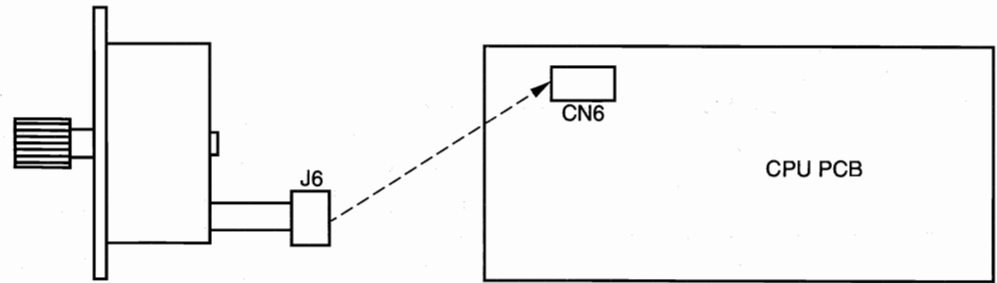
Configuration of the Paper Feed Motor Unit
